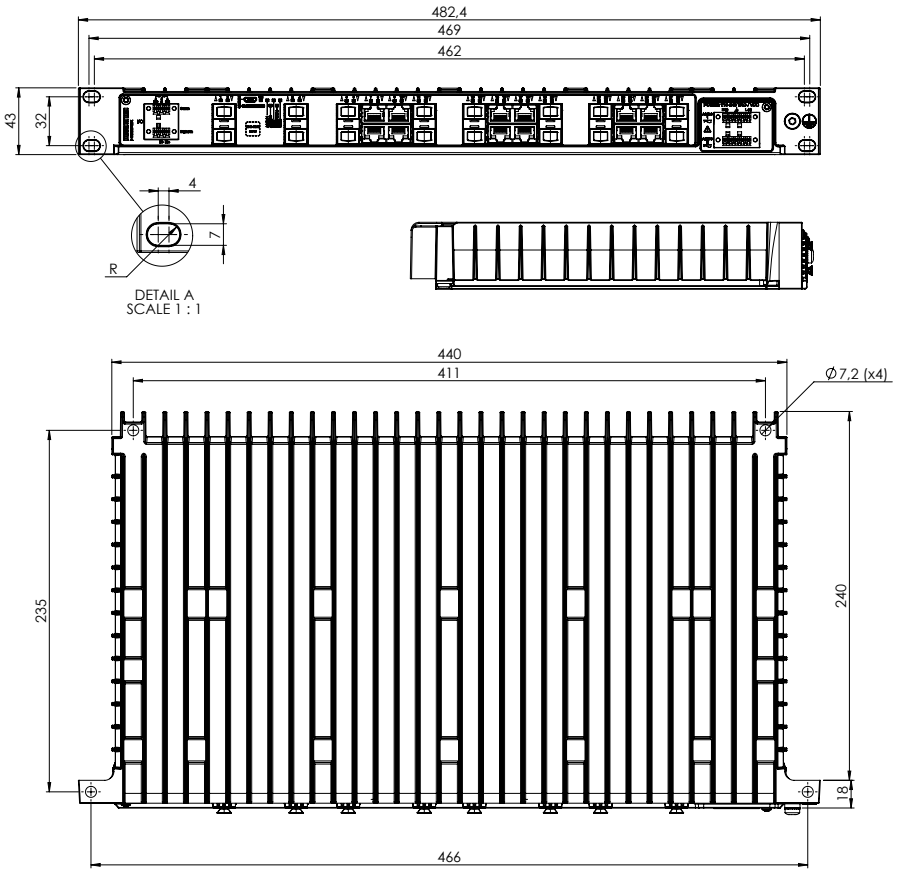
Dimensional drawing, illustrated by a RedFox-5728-F16G-T12G-HVHV
